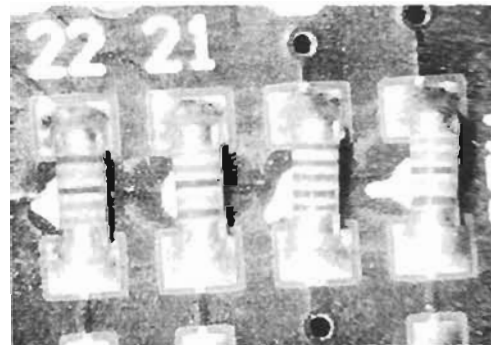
Adhesive stringing under two-terminal components (EPS)
